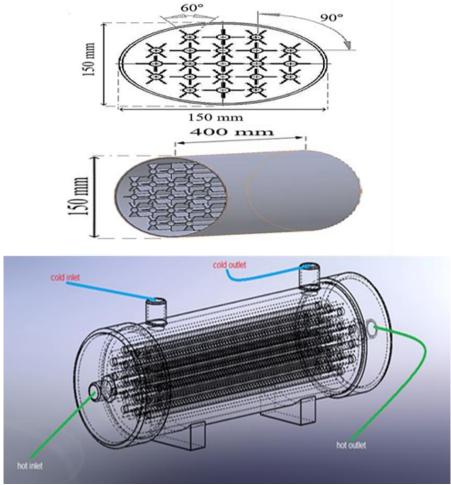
Geometry schematic of shell and finned tube heat exchanger
